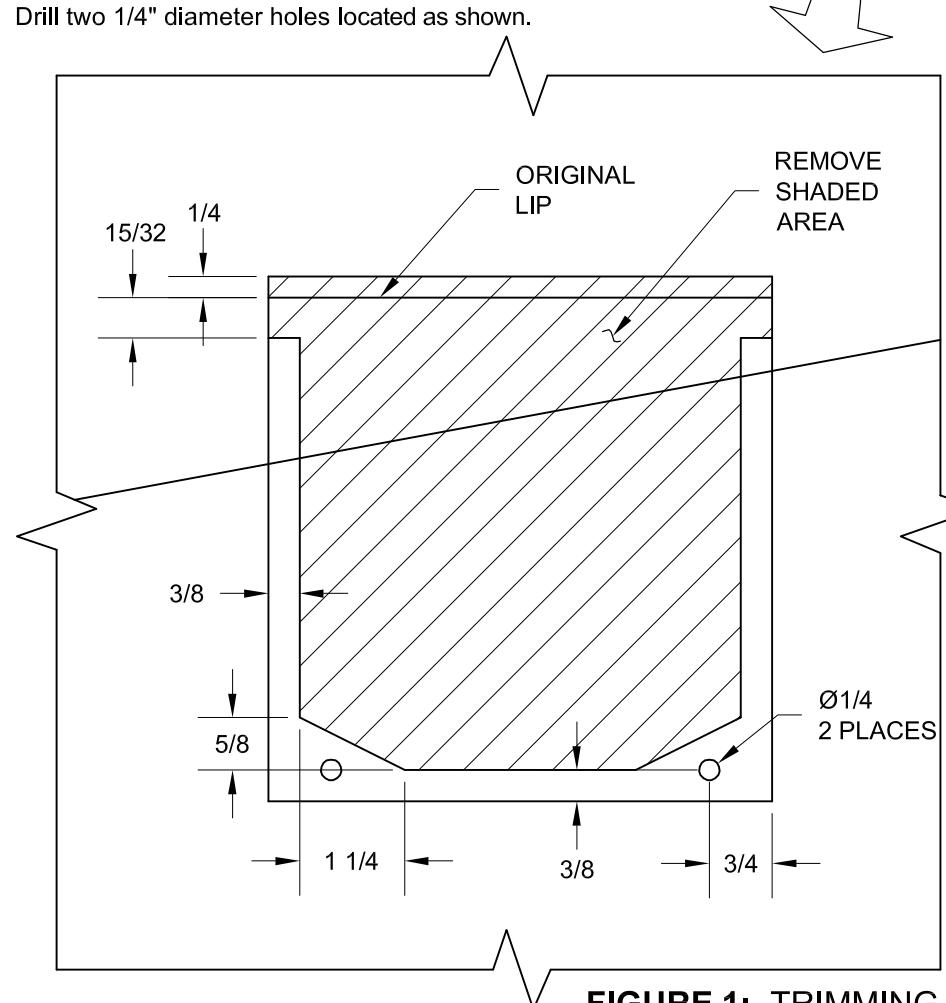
TRIMMING THE OIL DOOR RECESS
